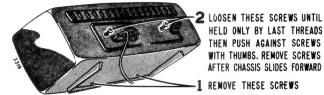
Rear View of Cabinet Showing Chassis Mounting Screws.
